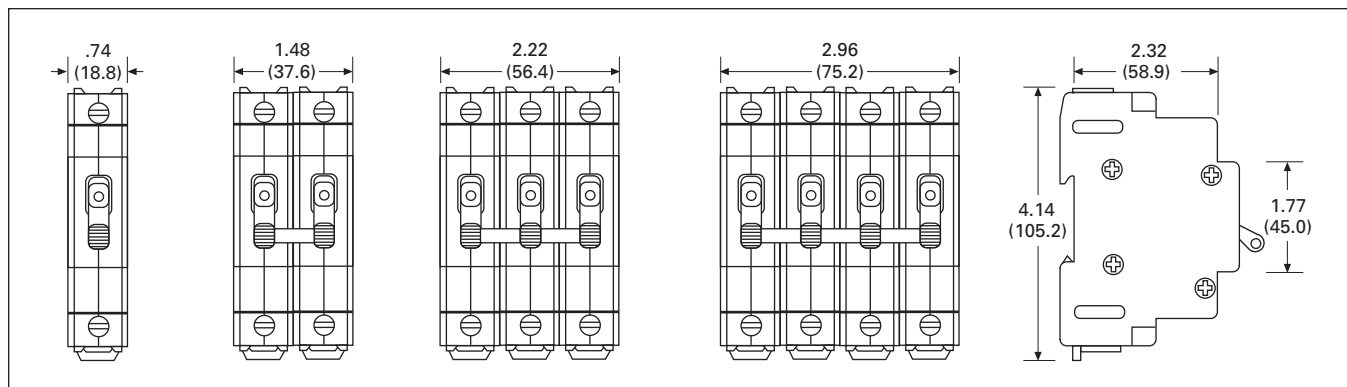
Approximate Dimensions in Inches (mm) — Not for Construction Purposes
